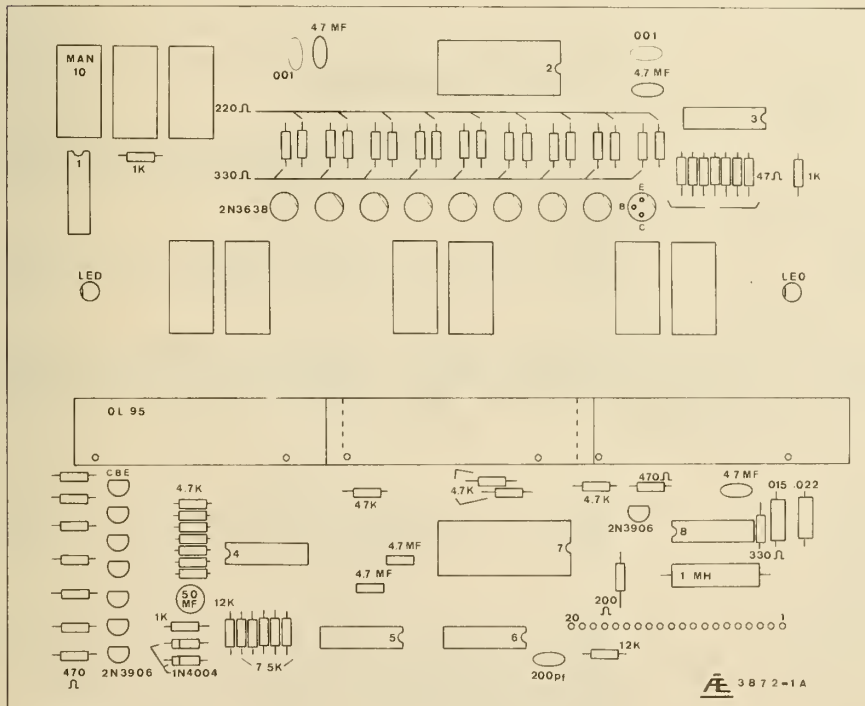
DISPLAY BOARD COMPONENT LAYOUT
